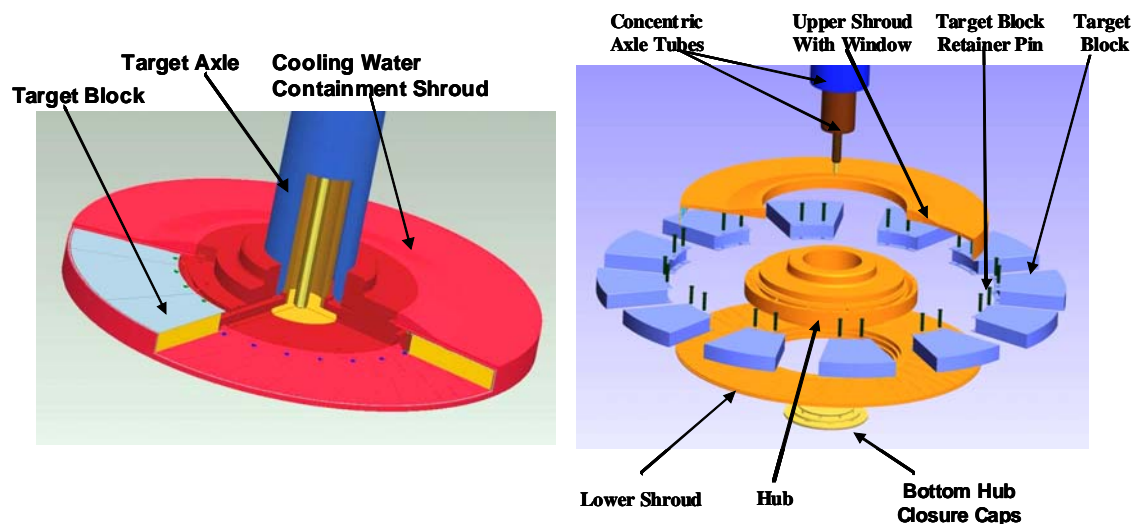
1.2 m diameter target disk and Exploded view of the assembly
